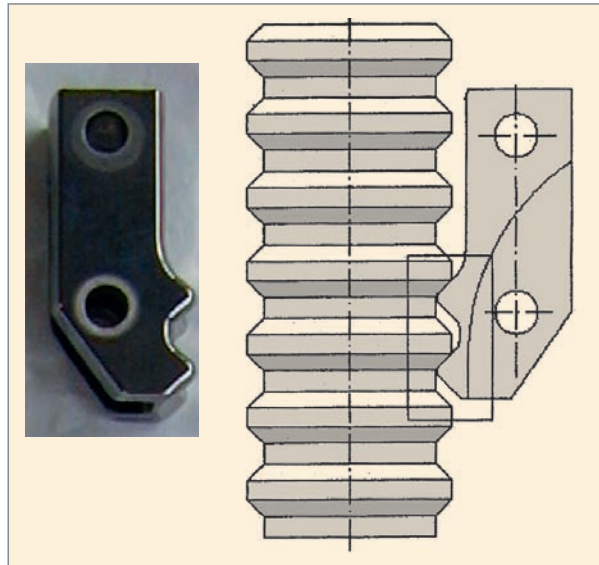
View of a Stellite-coated tooth latch arm (dim. ~5 cm x 1 cm), which is a part of control rod drive mechanisms (CRDMs), with the schematic representation of the contact surface between the latch arm and the grooved control drive rod.
